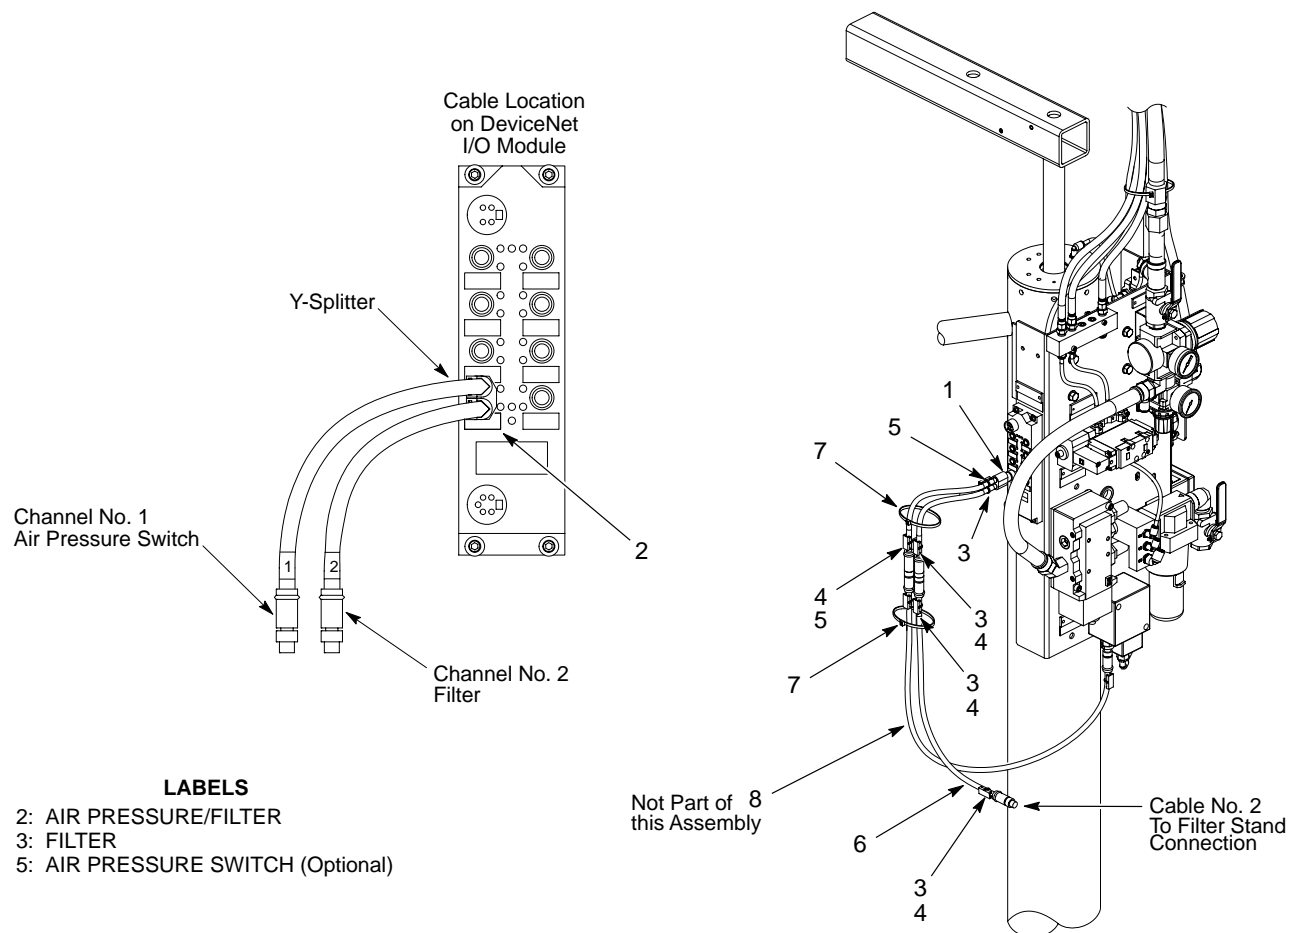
Installing the Filter Stand Module (Pressure Switch Configuration Shown)
